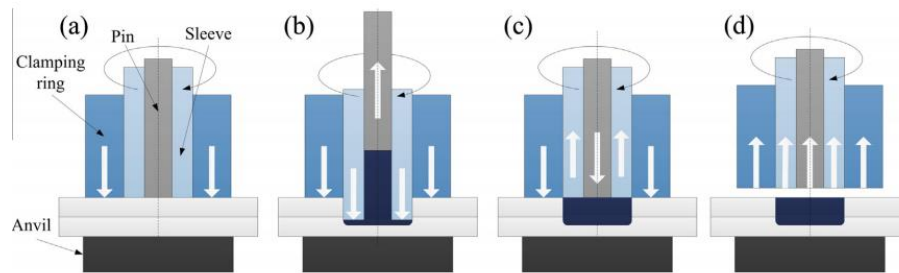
Schematic illustration of the refilled friction stir spot welding process [121]
